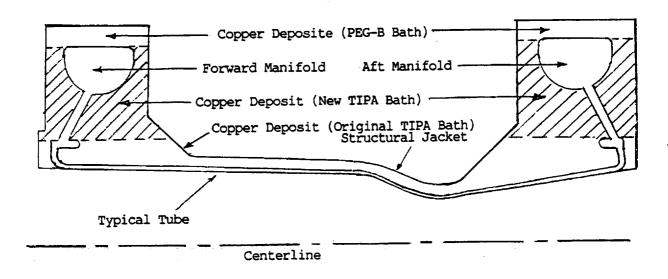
Copper Electroformed Tube Bundle Thrust Chamber Design.
